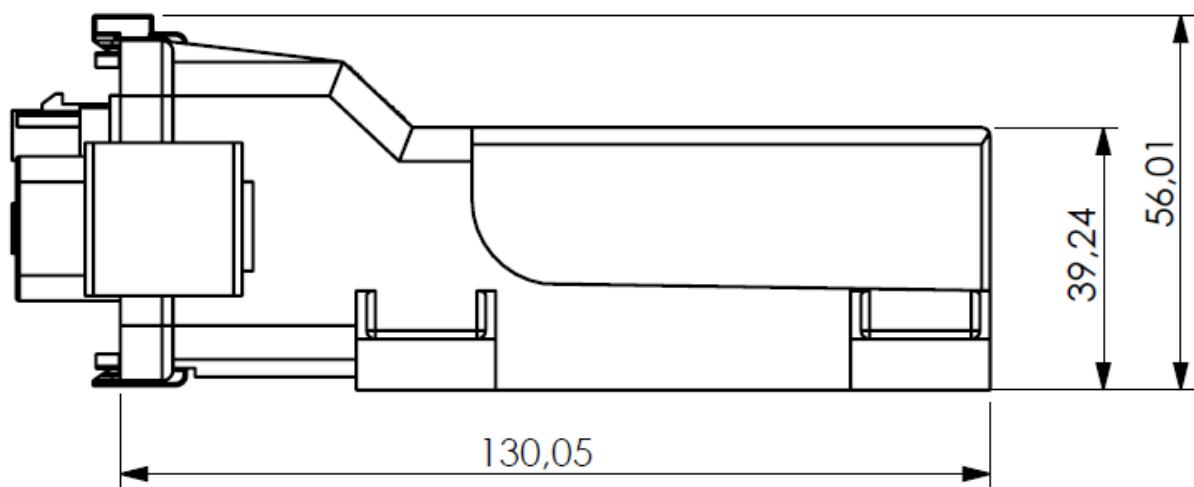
Verona Gen 4 Telemetry - Side View with Dimensions
